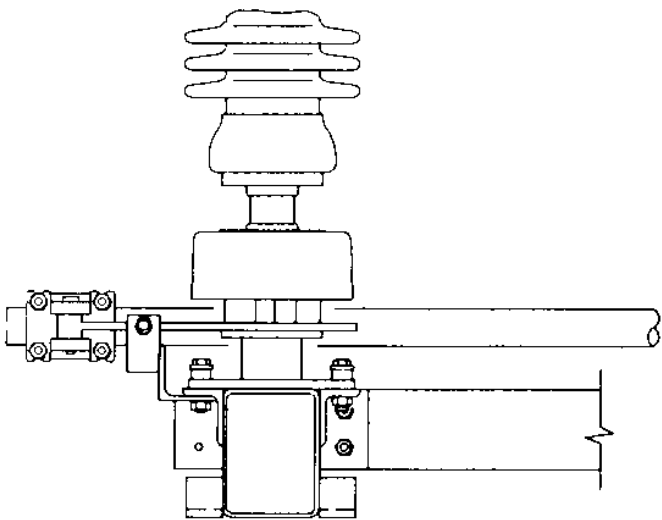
C and D Ball Joint Adjusting Screws 72-265-035-430
